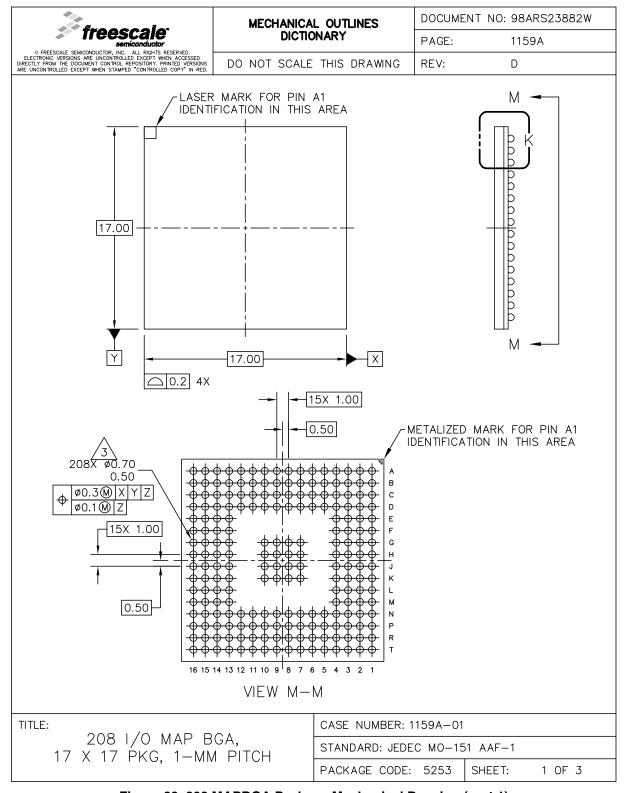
208 MAPBGA Package Mechanical Drawing (part 1)
